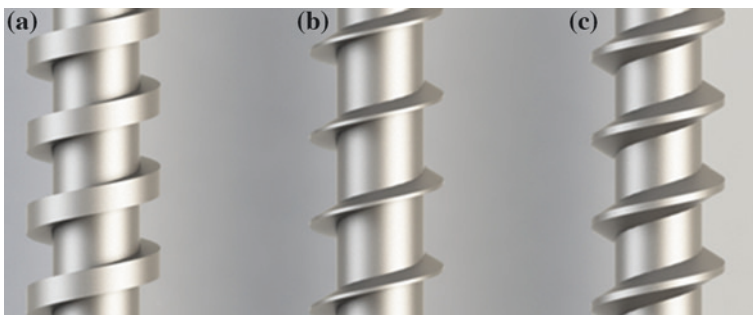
Different thread designs of pedicle screw. a Square shape. b Buttress shape. c V shape
